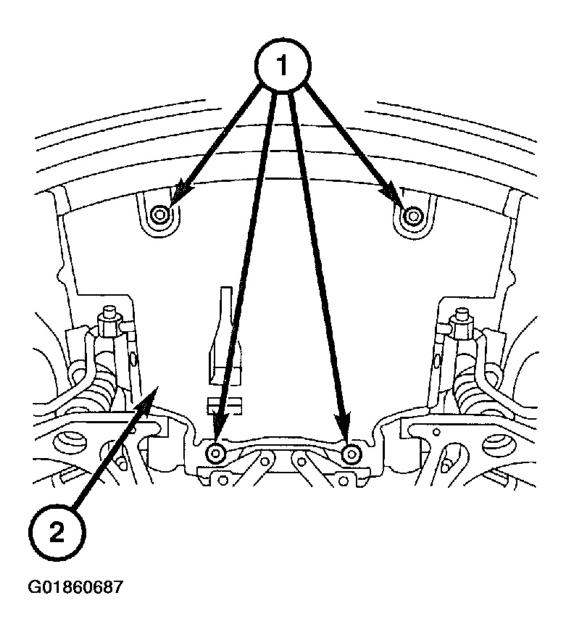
Removing Lower Splash Shield Screws & Splash Shield Courtesy of DAIMLERCHRYSLER CORP.
